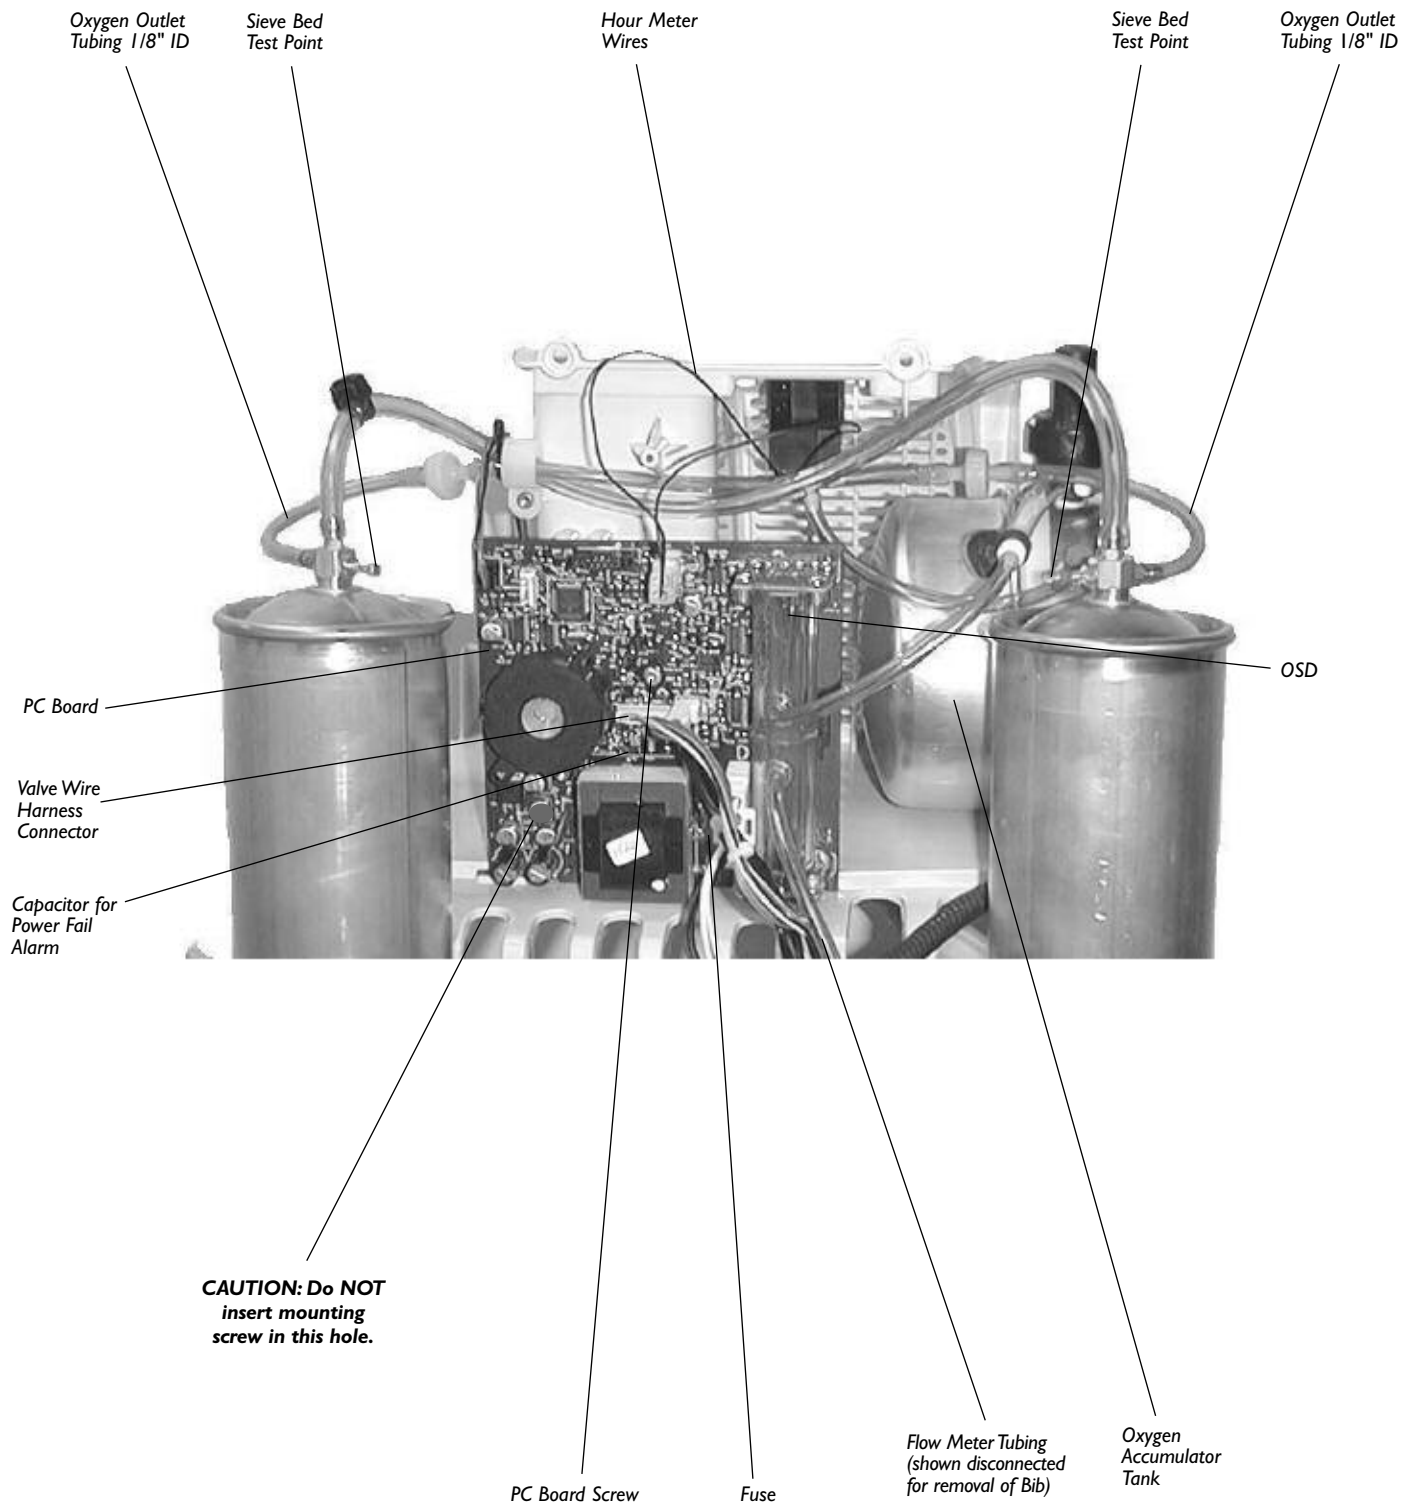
A - Interior, Front Upper View (515AKS and 515AKZ)
